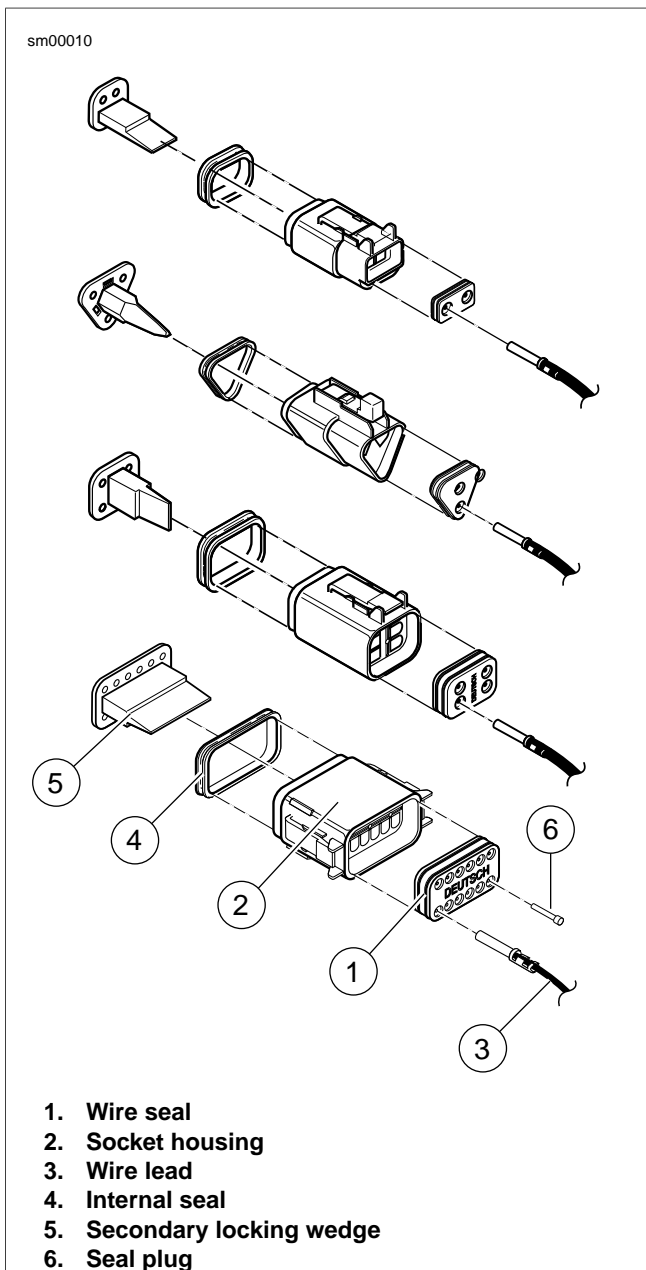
Deutsch Connector: 2, 3, 4 and 12-Place Socket Housings
